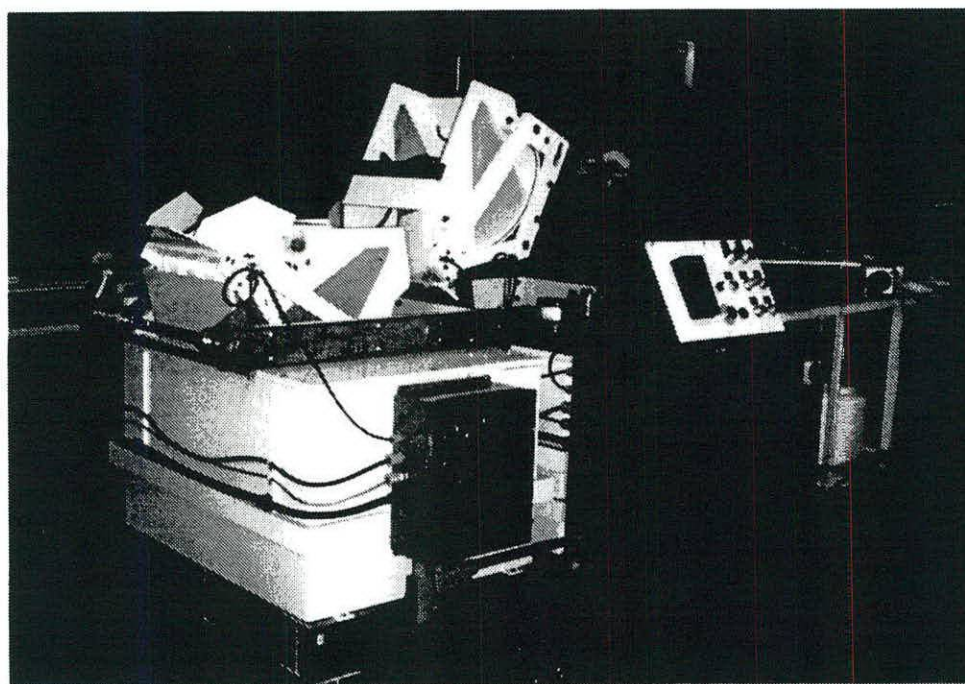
Open top, stationary, pivoting tumblers mounted on plating and rinse tanks showing the plating tumbler discharging parts into the rinse tumbler.
